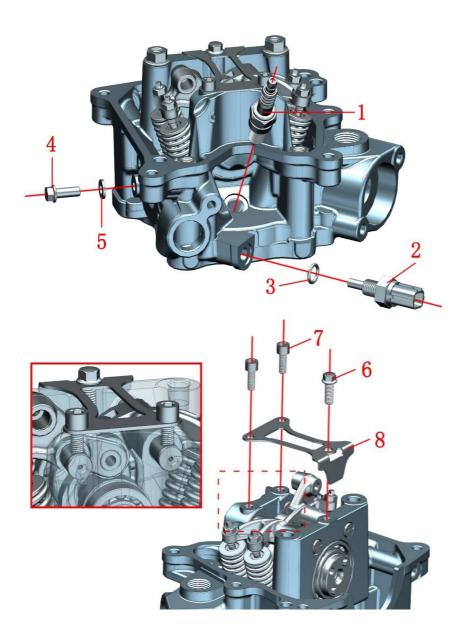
CYLINDER HEAD		Cylinder head cover assembly-2	СНК	(0)
